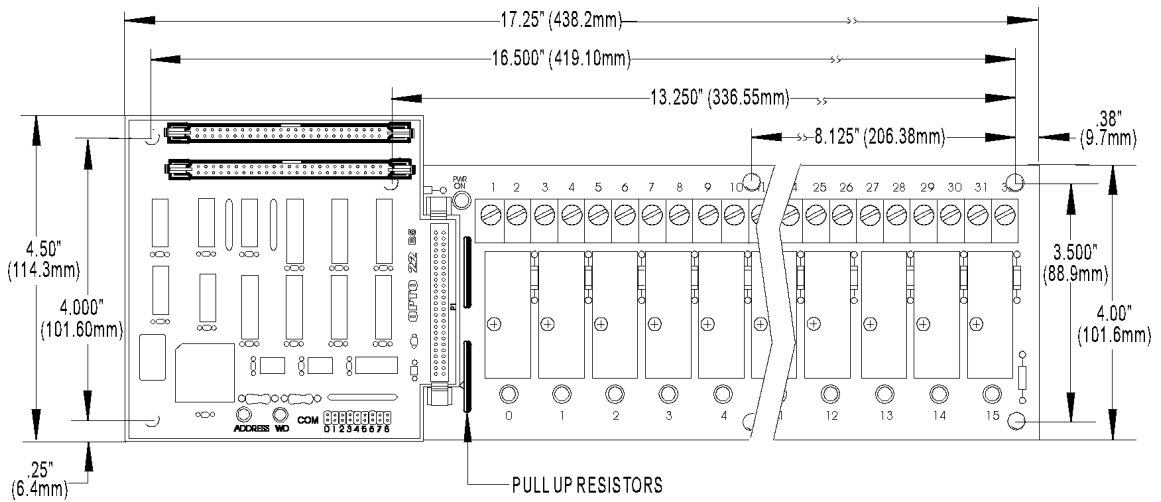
Mounting Dimensions of the PB16H with a B5 Installed
